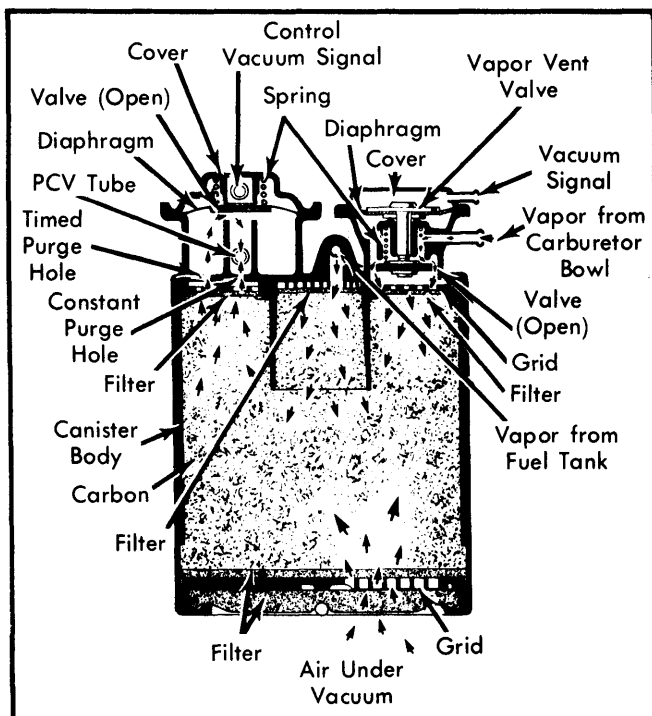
Cutaway View of Carbon Canister with Purge Control Valve & Vapor Vent Valve
